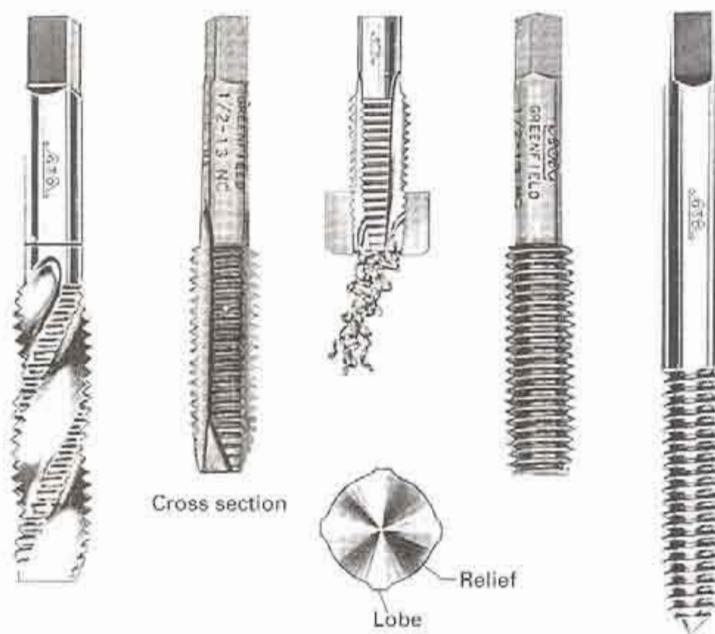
(Left to right) Spiral-fluted tap; spiral-point tap; spiral-point tap cutting chips; fluteless bottoming tap and fluteless plug tap for cold-forming internal threads; cross section of fluteless forming tap. (Courtesy of TRW-Greenfield Tap & Die.)
